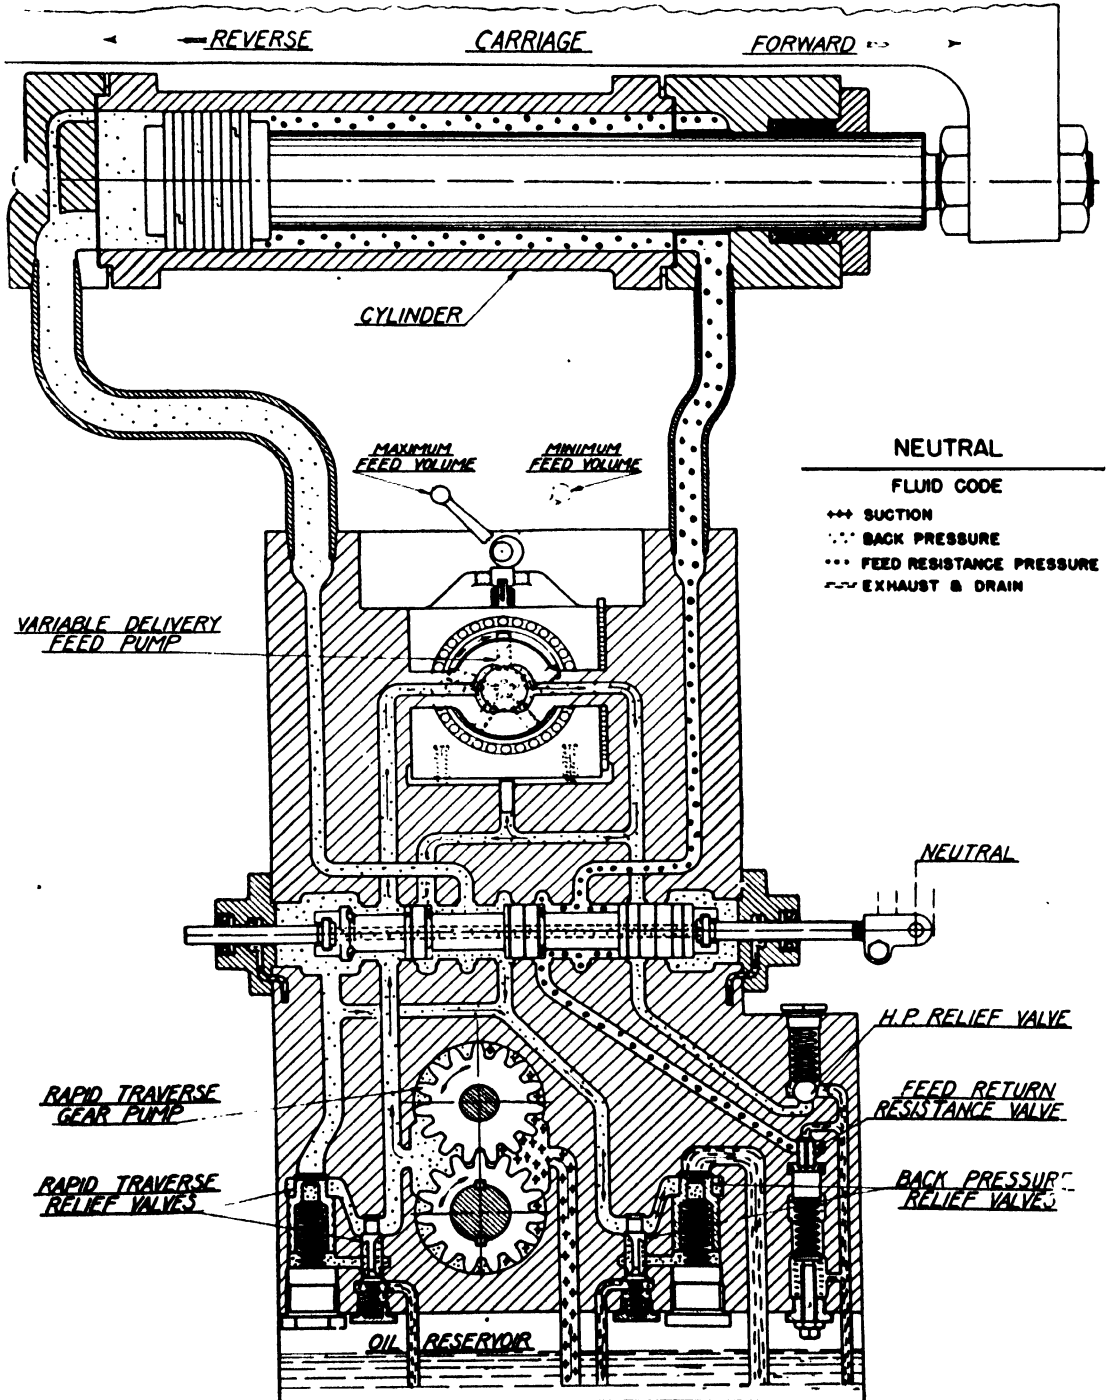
Oilgear fluid power feed, neutral position. (The Oilgear Co., Milwaukee, Wis.)
